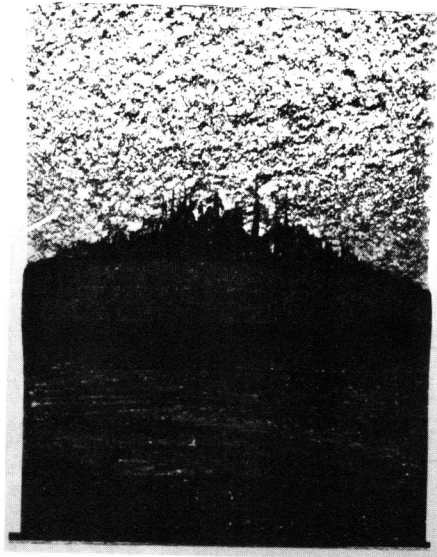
Fracture surface of a 1/2 CT-specimen
